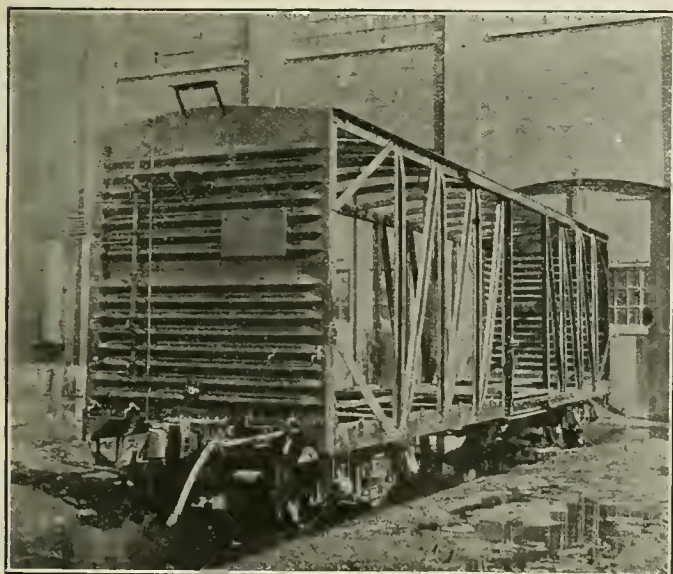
CAR WITH STEELWORK COMPLETED AND READY FOR FINISHING
